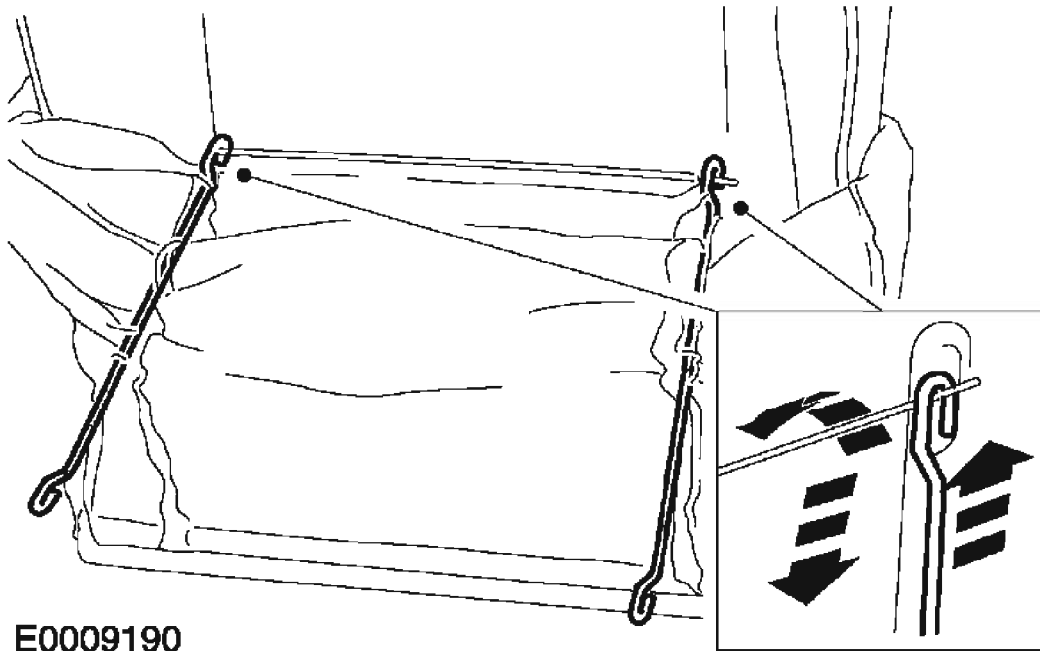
Installing Side Air Bag Module Deployment Chute Retainer
